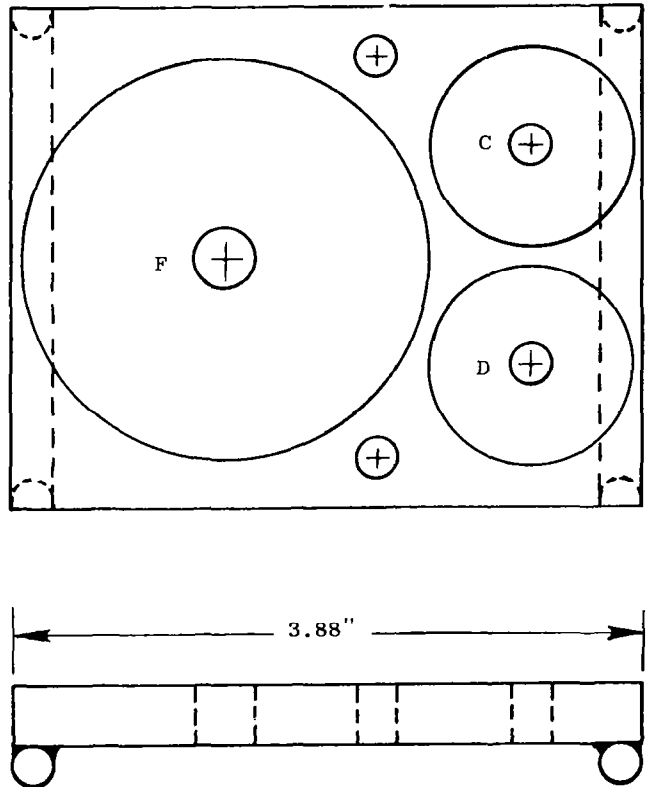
Arrangement of Springs and Fixtures for Endurance Test
